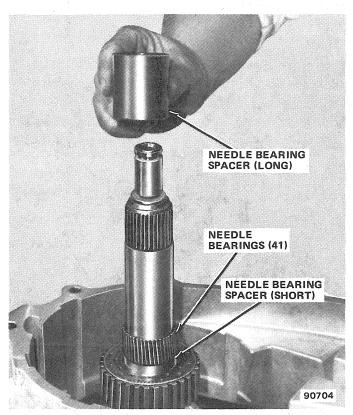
D-65 Mainshaft Needle Bearings and Spacer Installation
